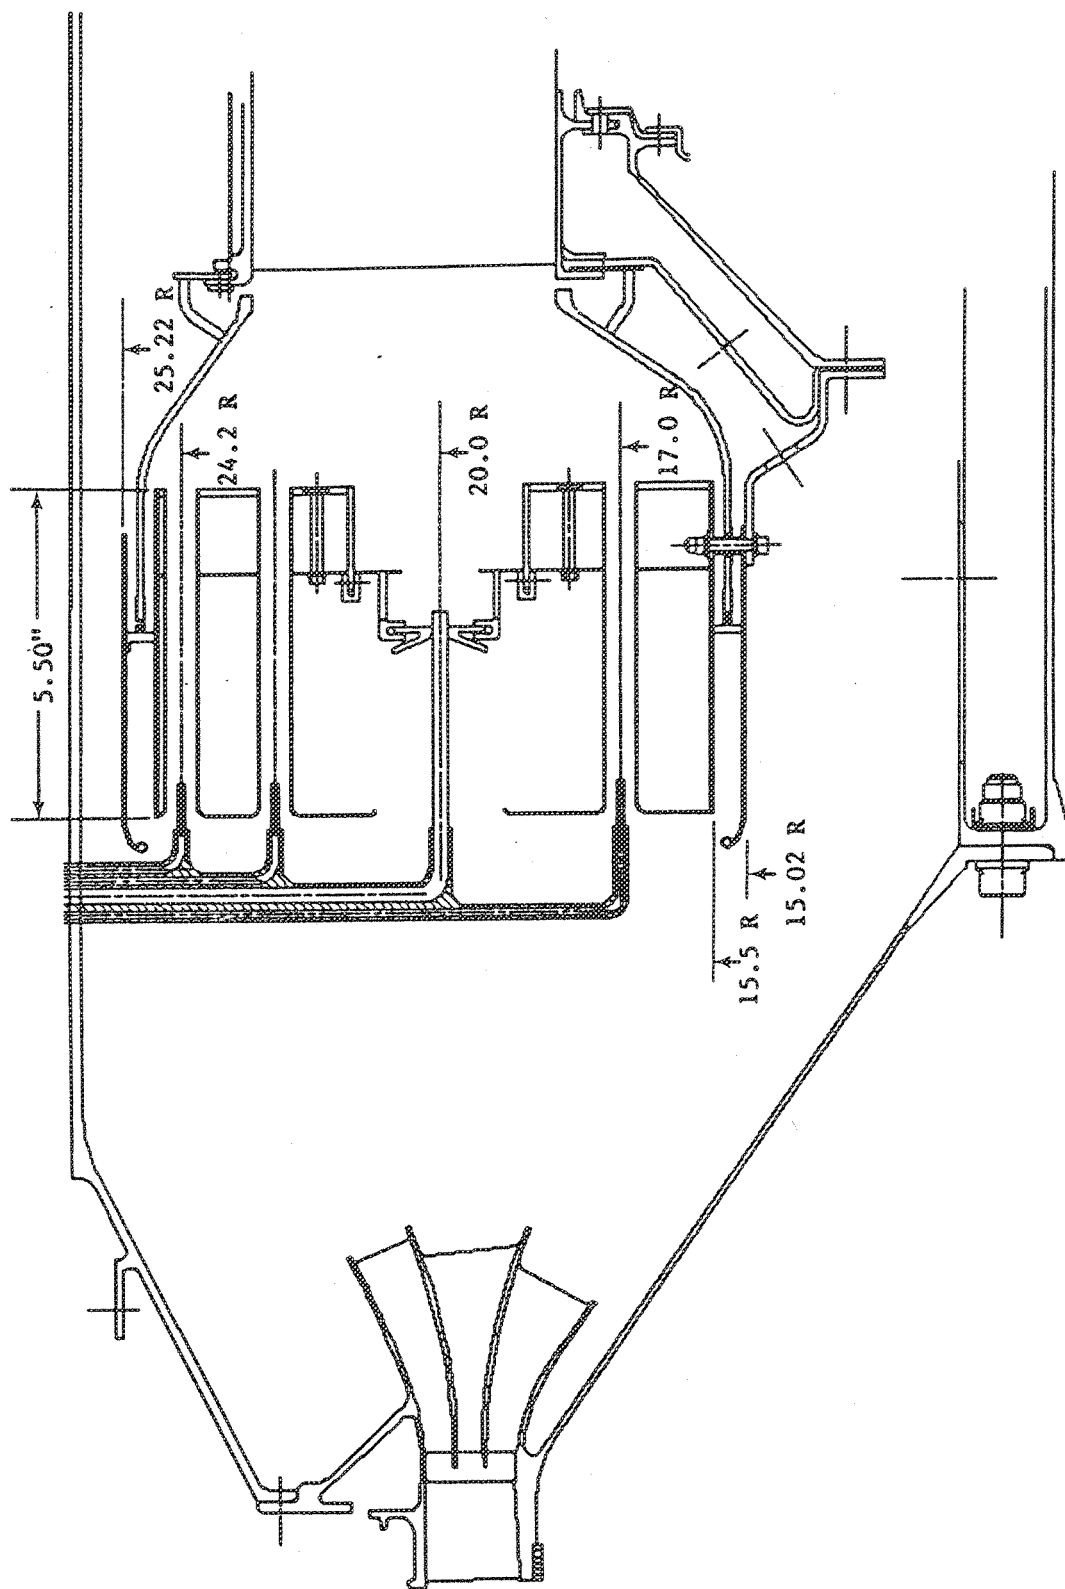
Mechanical Design Layout of the IMFH Combustor (Side View).
